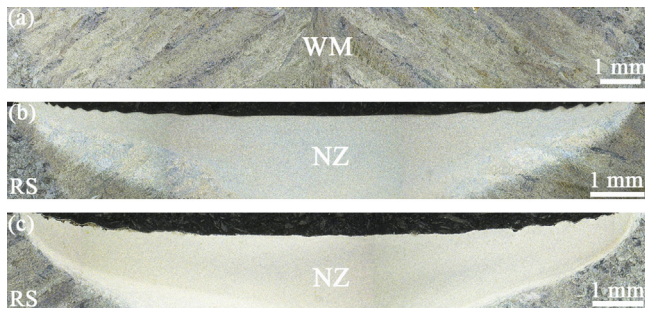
Macrostructure of (a) weld metal (WM) and FSW joints with parameters of (b) 400 rpm–200 mm/min (FSW-a) and (c) 125 rpm–100 mm/min (FSW-b).
